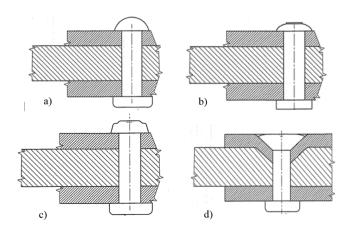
Example of used rivet types (RH rivet without compensator (a), CherryMax with compensator (b), RH rivet with compensator (c) and CSH rivet with compensator (d))
